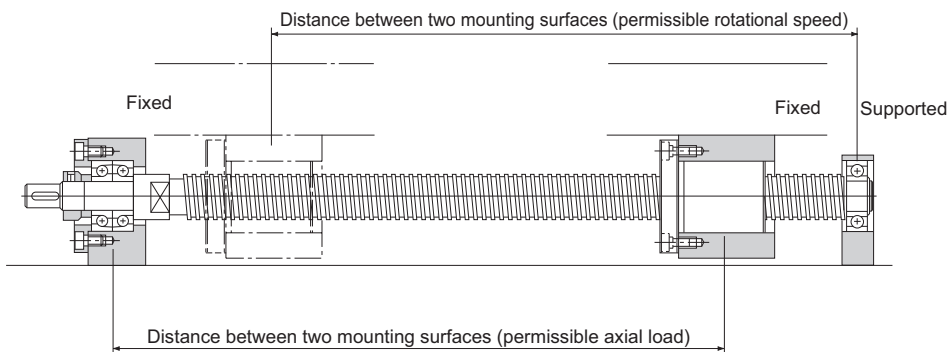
Screw Shaft Mounting Method: Fixed - Supported
